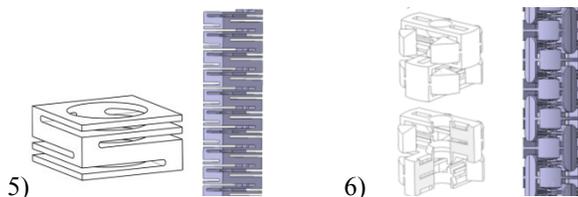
Compliant mechanisms (5) realized by a weakened bar and CR-joints (6) based on rotational flexure joints.
